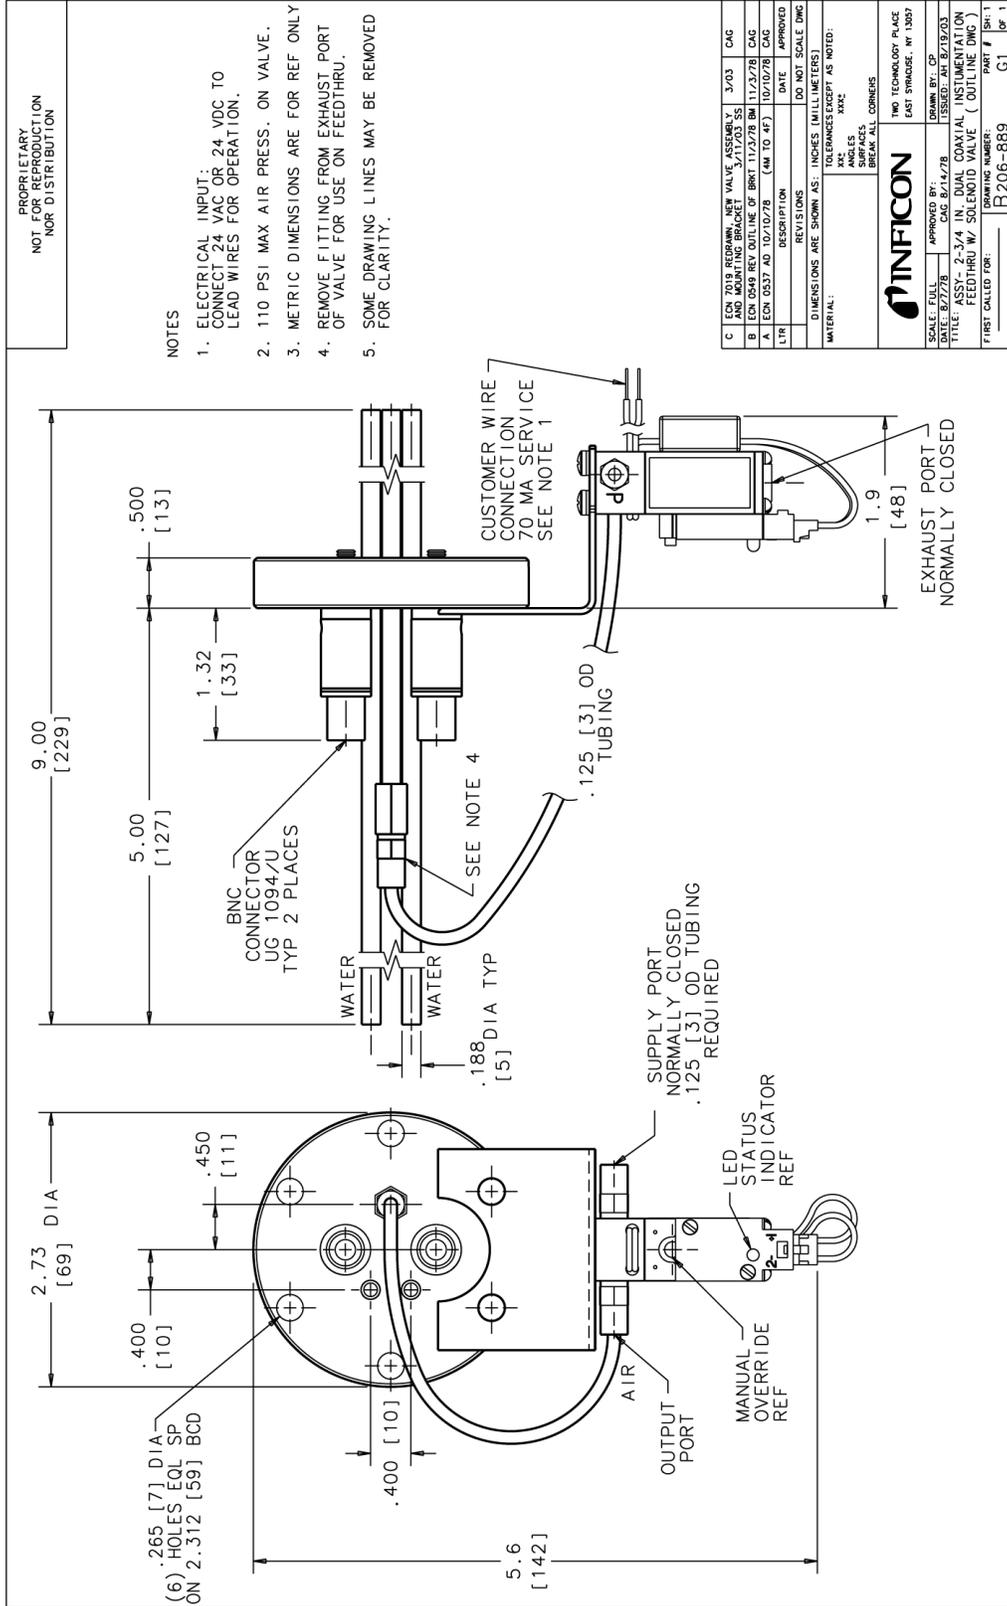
CF40 (2-3/4 in. ConFlat) dual coaxial feedthrough and solenoid valve outline
